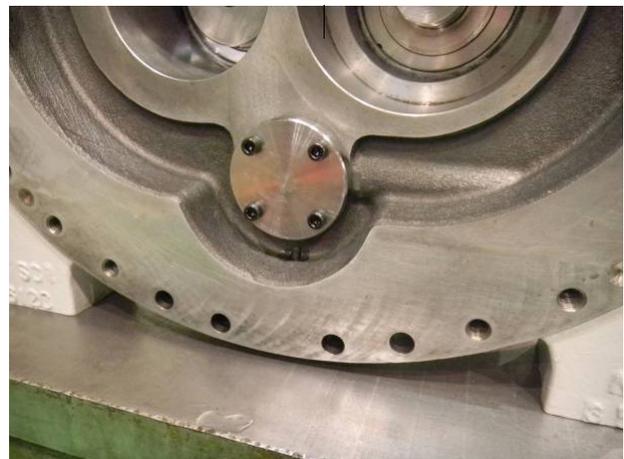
Spacer and Weight Jig (example) for press fitting a Bearing
